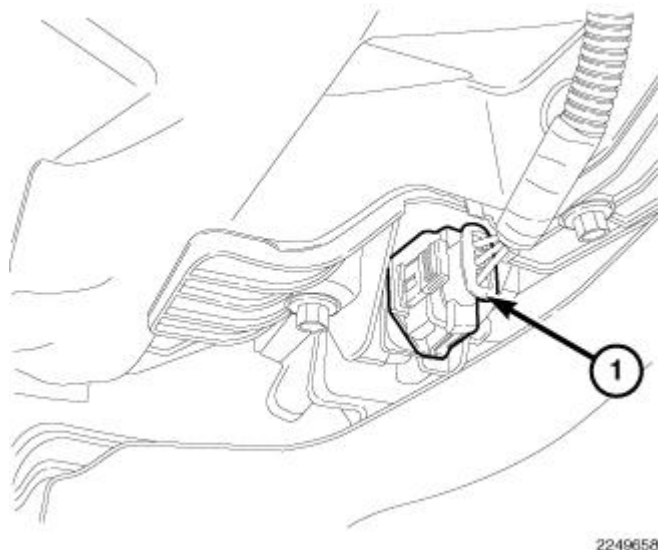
Crankshaft Position Sensor (CKP) Harness Connector
